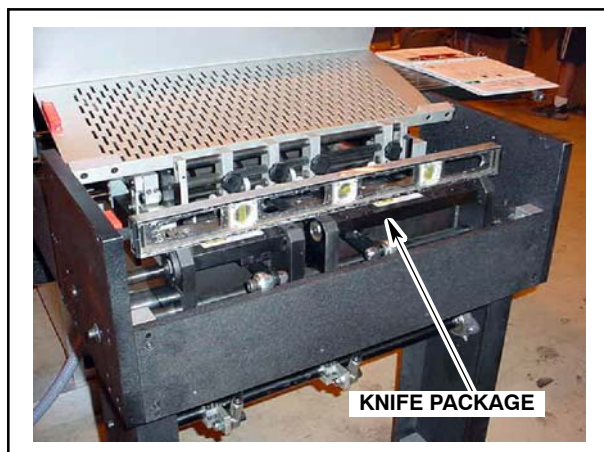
Level Tab Cutter Assembly Side to Side
